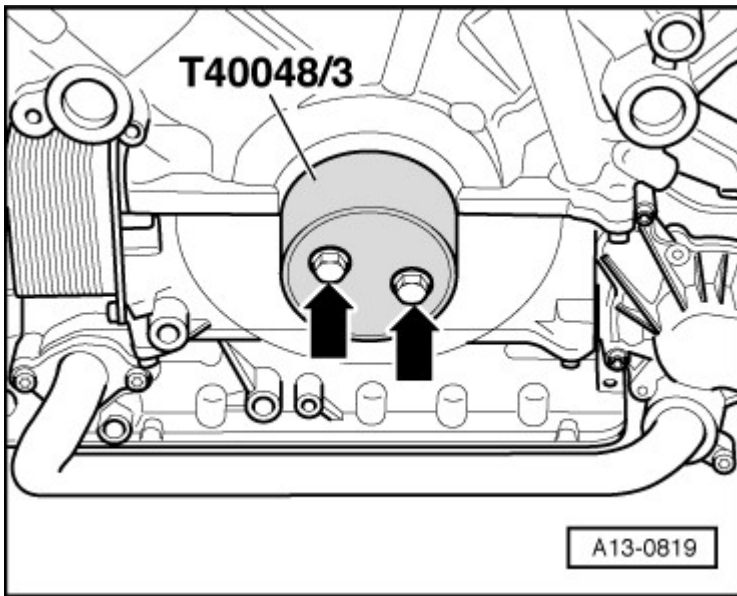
Positioning Pressure Sleeve T40048/3 With Bolts On Crankshaft
